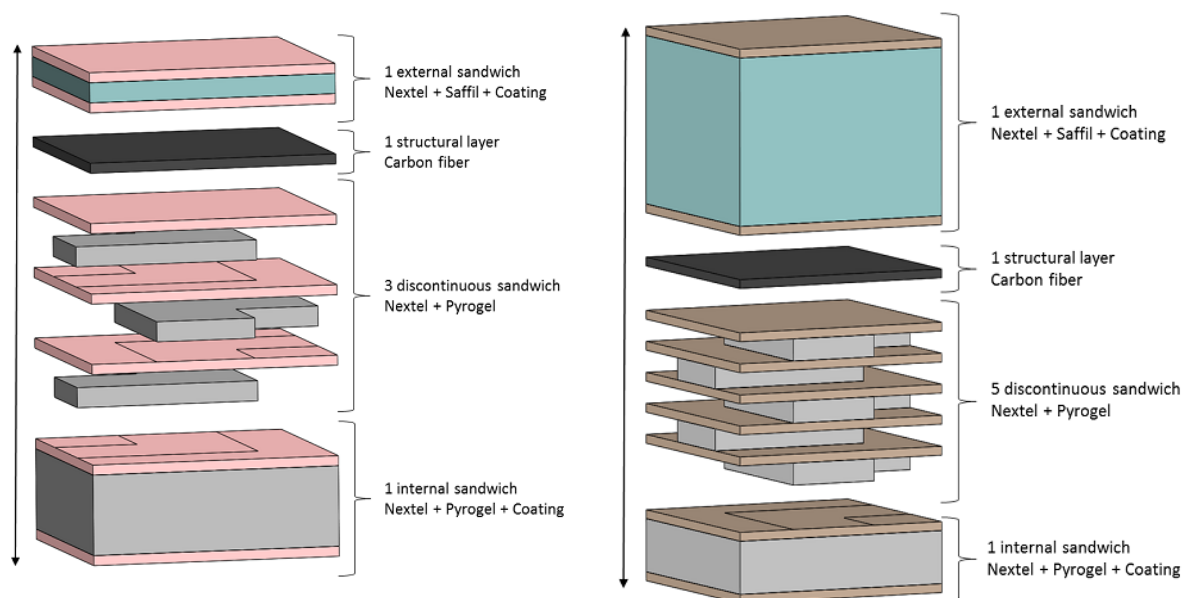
Flexible TPS layout of upper section (left) and lower section (right)
